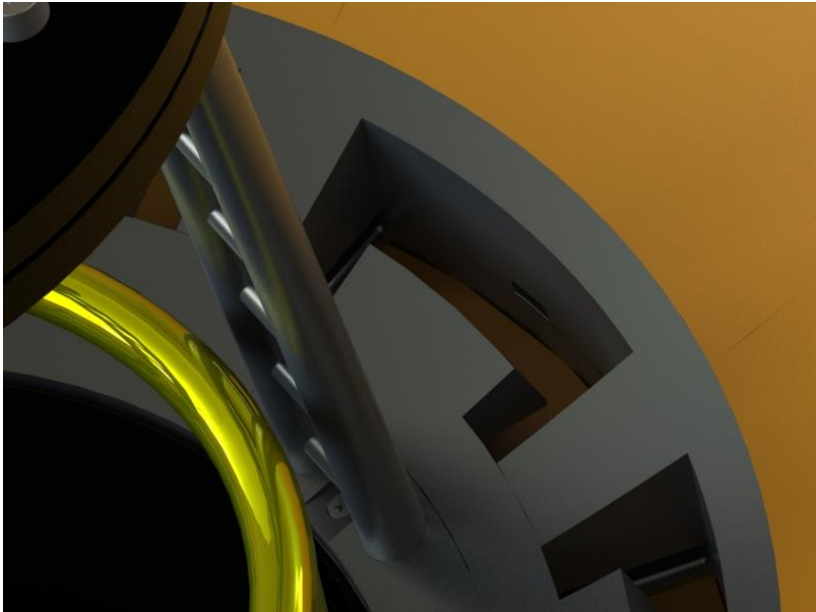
Detailed view of the circular and blade connection. Created in SolidWorks.
